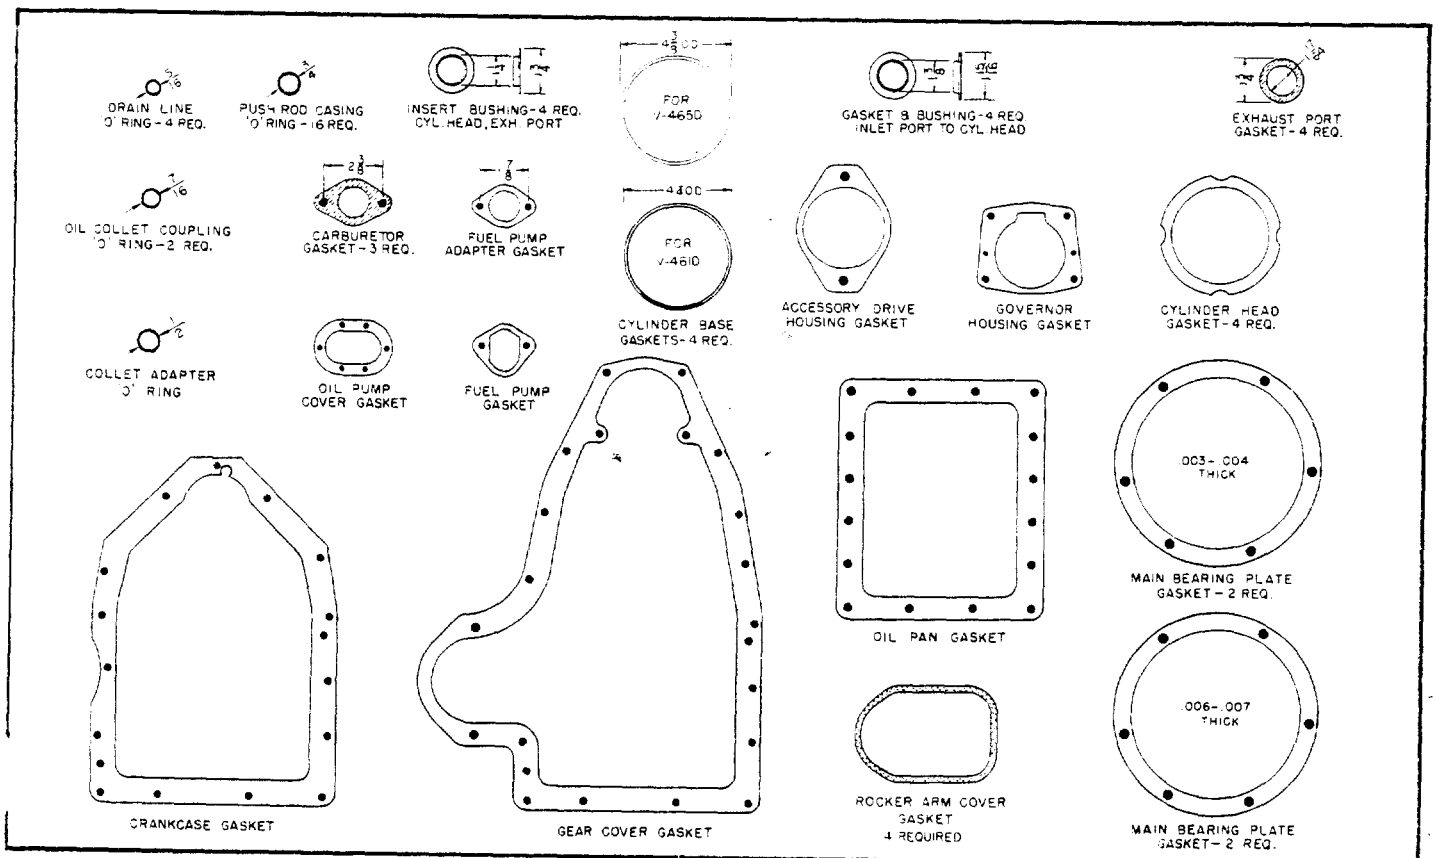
Ref. No. 257, ENGINE GASKET SET
